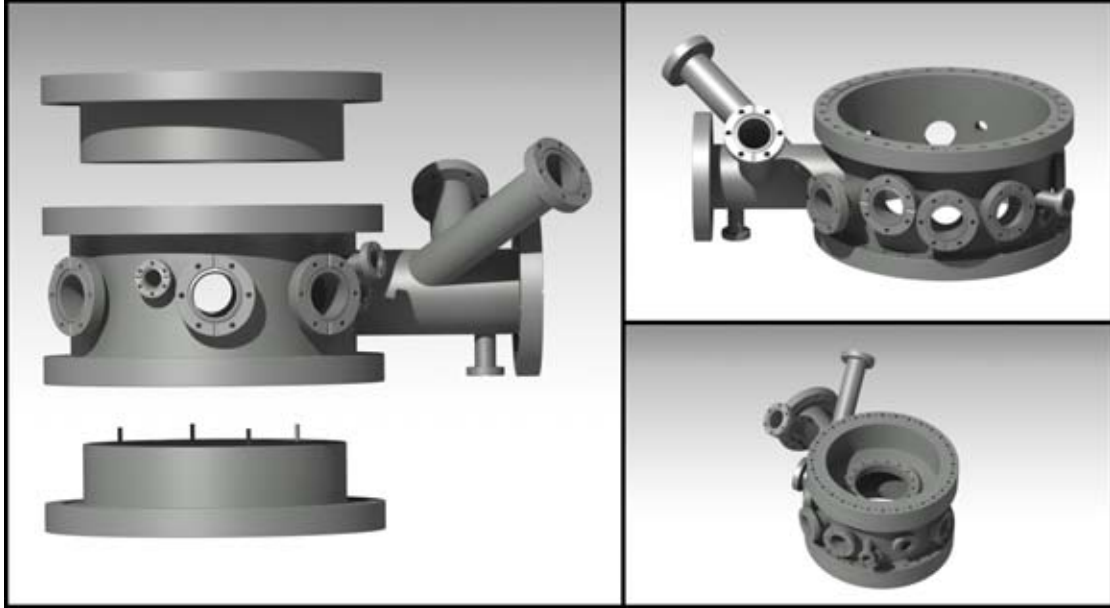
Shown are CAD-drawings of the final vacuum chamber from different perspectives. For orientation: The Zeeman slower will be mounted opposite to the large (pumping) tube and the glass cell in front of the left picture.
